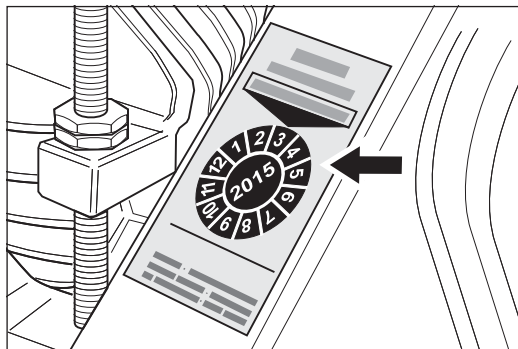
The test seal at the belt guard certified the electrical and mechanical safety of the machine.
